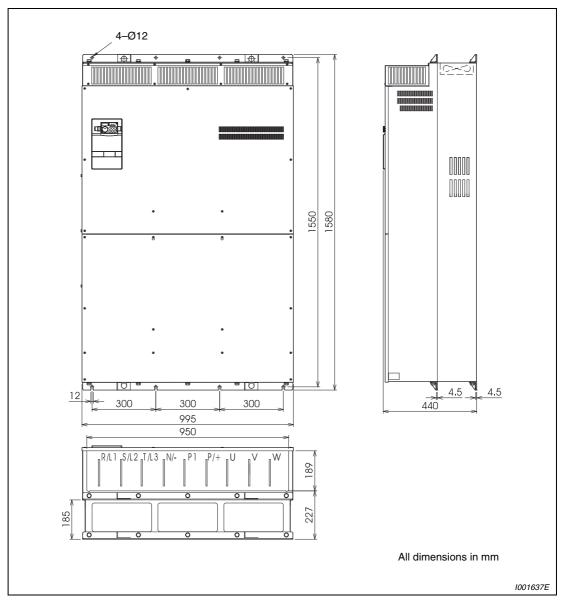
Dimensions of FR-A740-09620, FR-A740-10940 and FR-A740-12120
